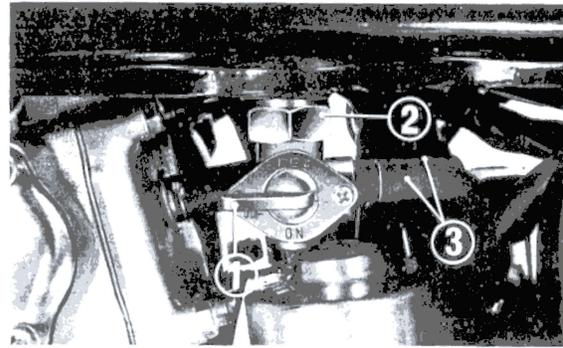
(1) Fuel cock lever (2) Fuel cock fixing nut (3) Fuel tube
